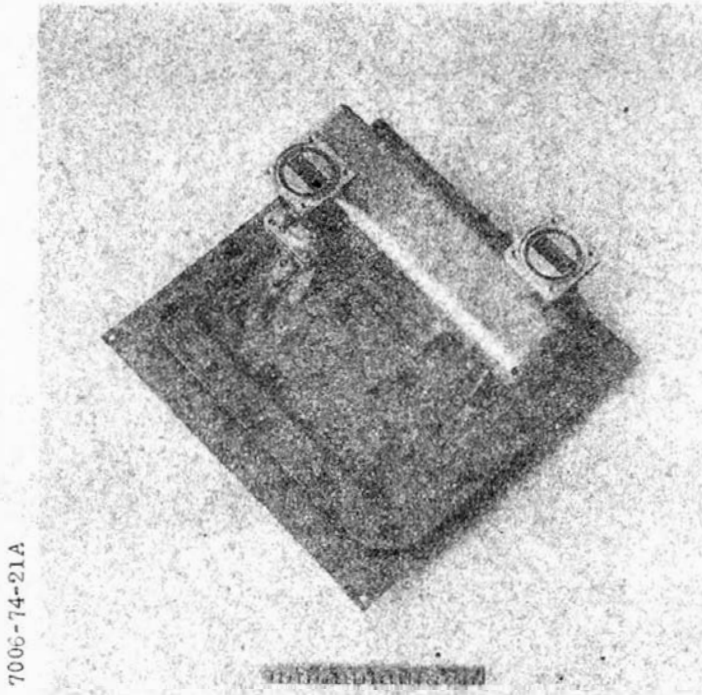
MISTRAM Antenna Assembly (Inboard View)
